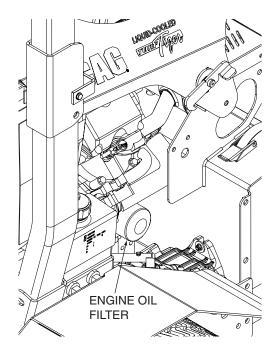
Oil Filter Location Gasoline Engine Shown
